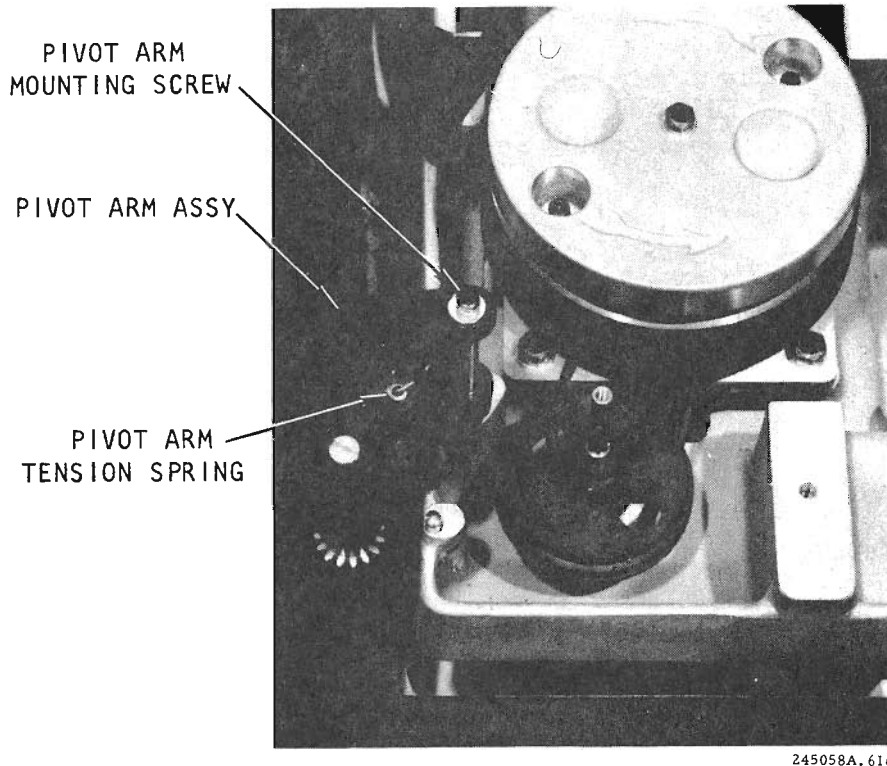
Pivot Arm Assembly (Roller Removed)
